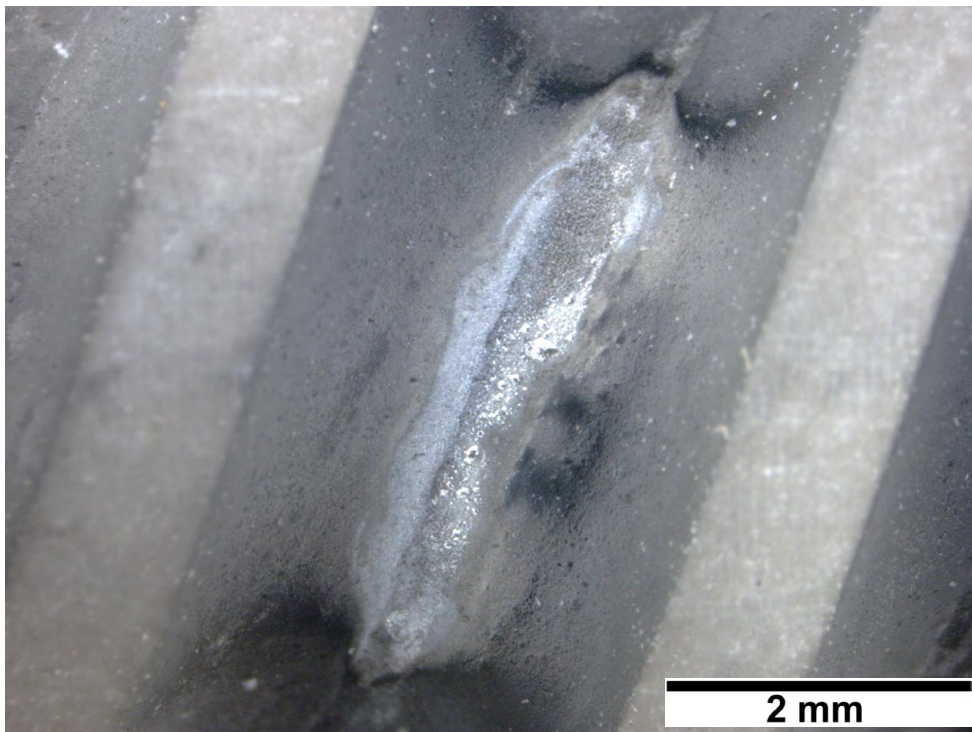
Surface reaction zone on the alumina insulator, after testing, with the Ta wire removed. (20x)
